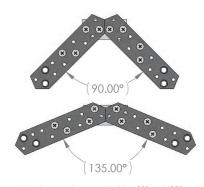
Figure A. The top mounting plates can be assembled into 90° and 135° corner brackets.
